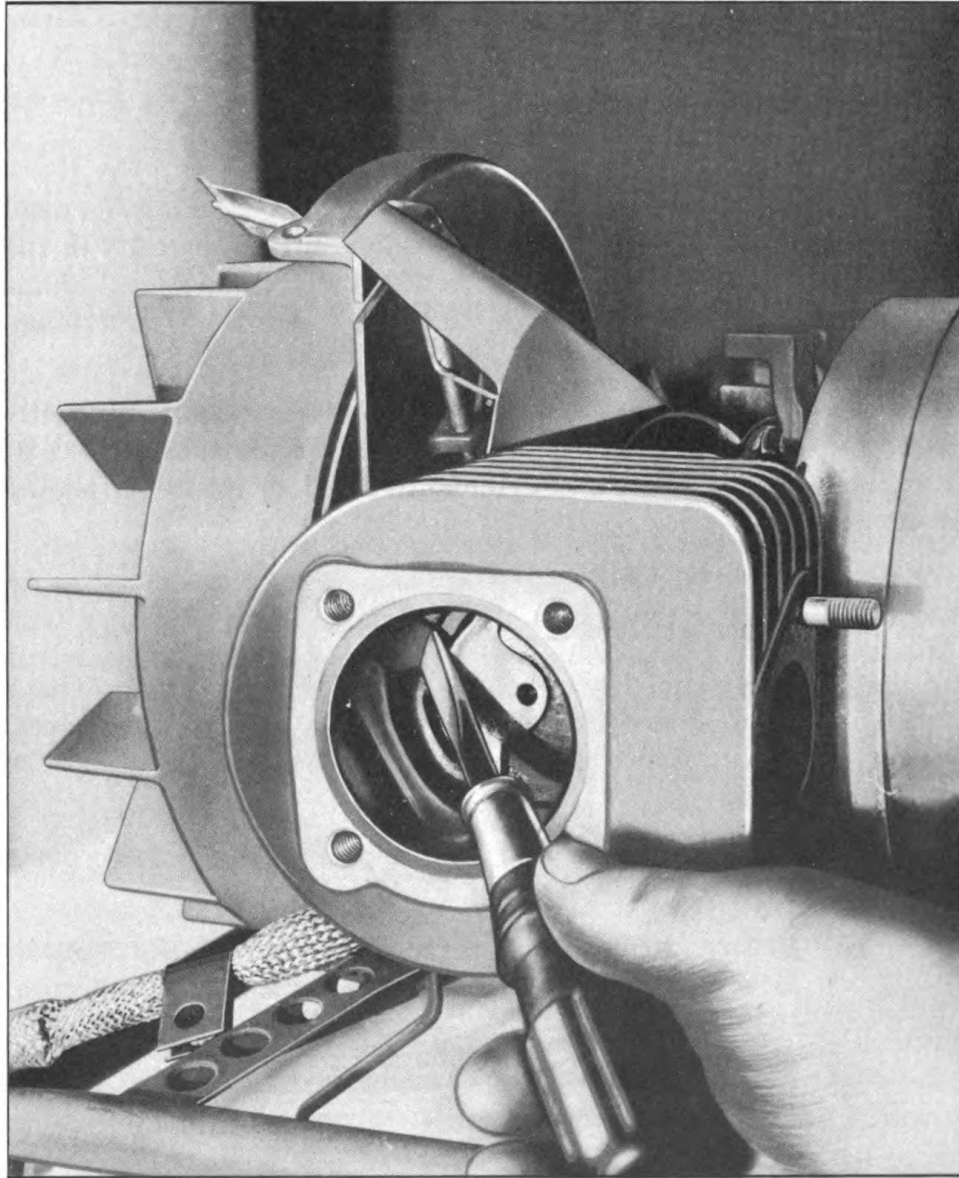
CARBON REMOVAL—INTAKE PORTS
